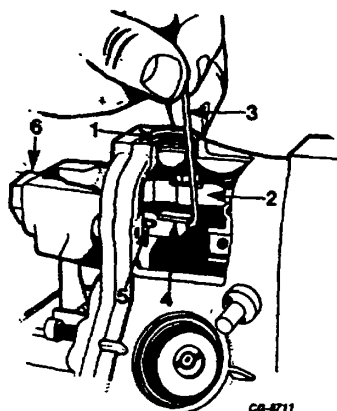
Engaging Stop Shackle to Rocker Arm Pin (Governor Housing Cut Away for Illustration)
